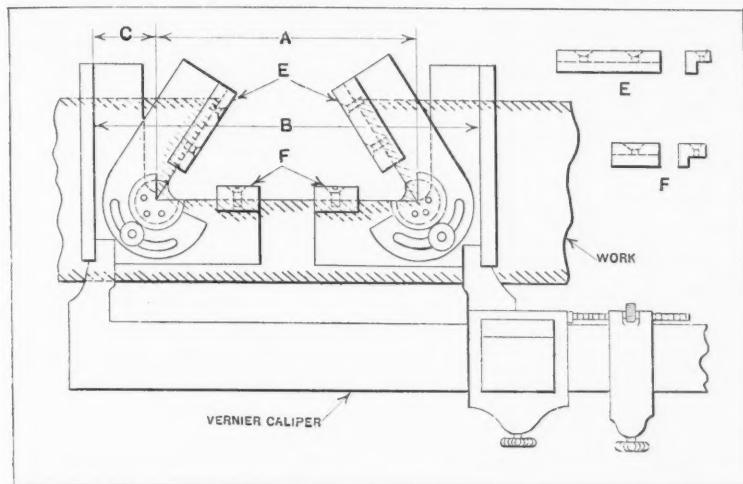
Method of Using Vernier Caliper for Measuring Groove Member of Dovetail
